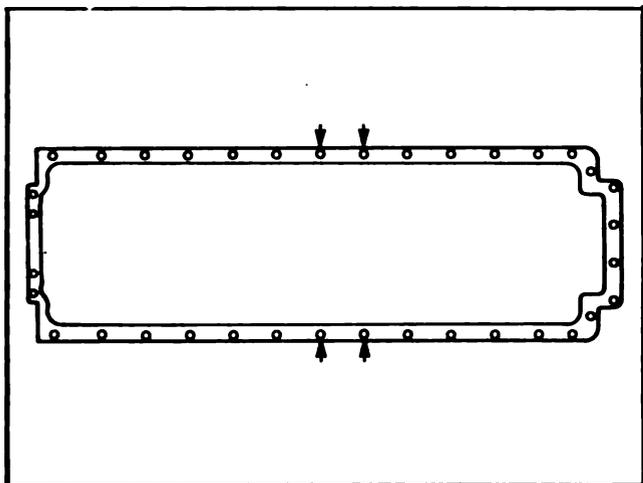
Install The Capscrews Into The Oil Pan.
